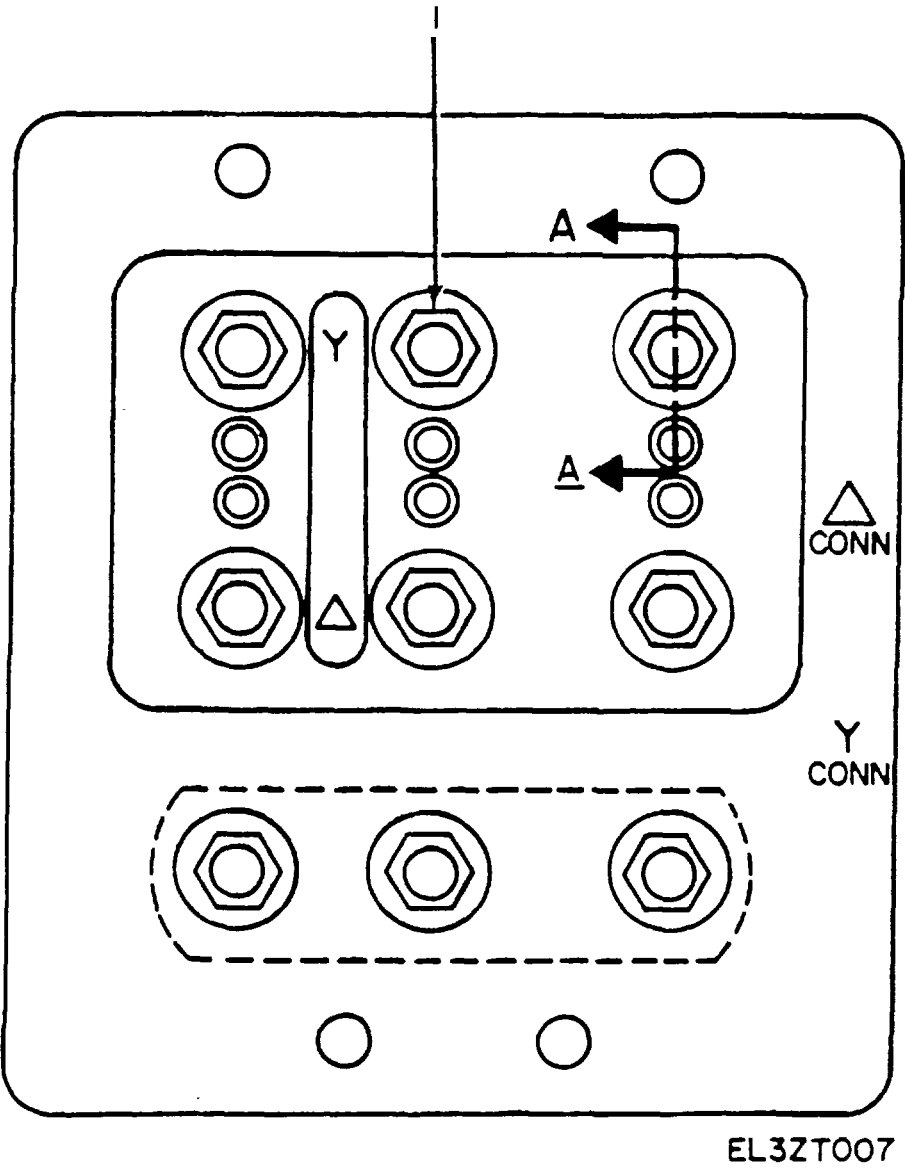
Motor Generators PU-126/U, PU-126A/U, PU-126B/U, Change Board Assembly.
